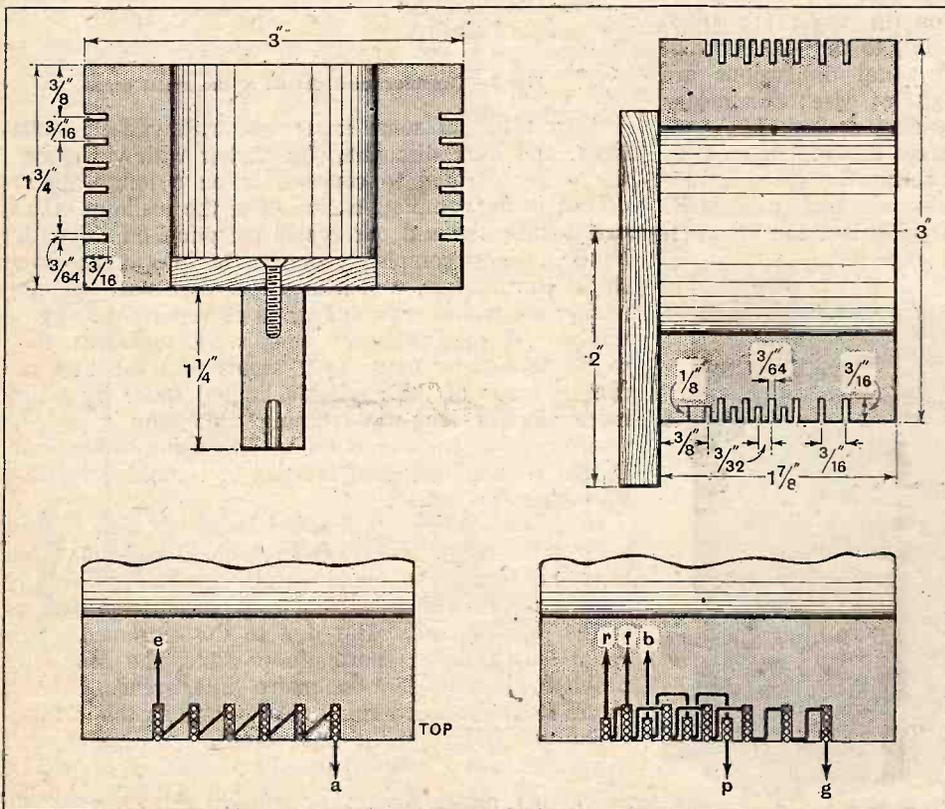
Dimensions of the formers for aerial-grid coil and H.F. transformer. Below: sections through ribs, showing disposition and connections of windings.
